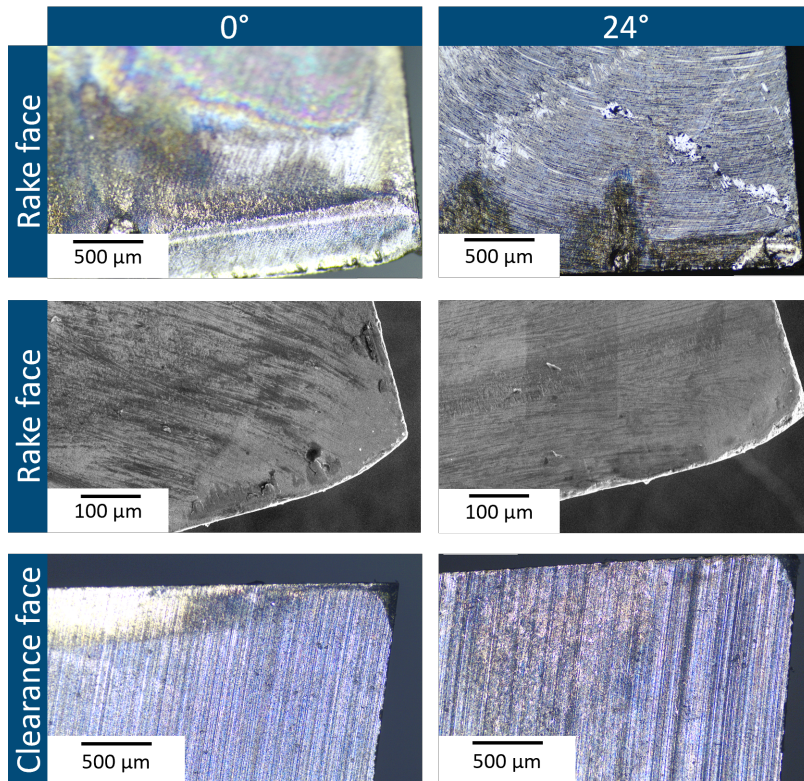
Microscopical pictures of the rake faces and the clearance faces of the tools in CW625N after 39 min.
